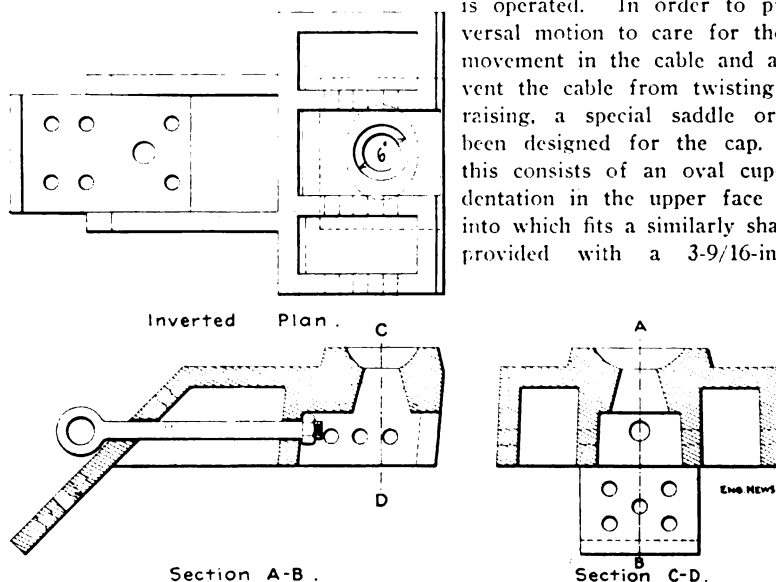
DETAILS OF UNIVERSAL JOINT CAP.
